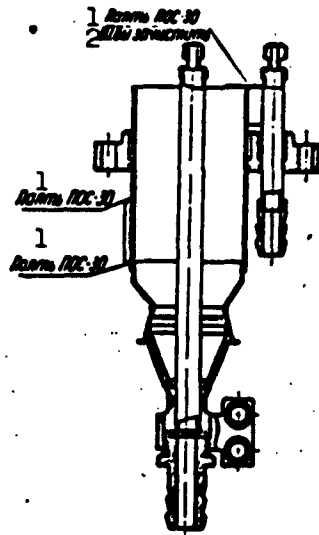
Coaxial input. 1) POS-30 solder; 2) debur seam.
